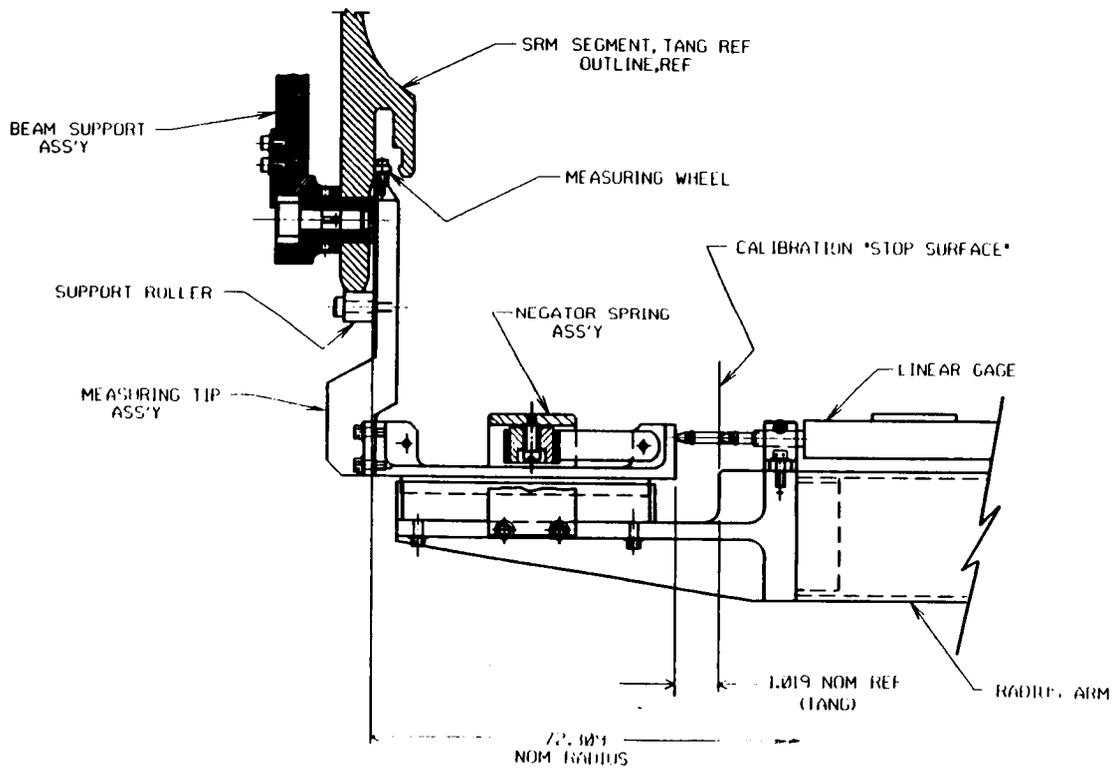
SRM Profile Measuring Tool, 97M50380-7,
